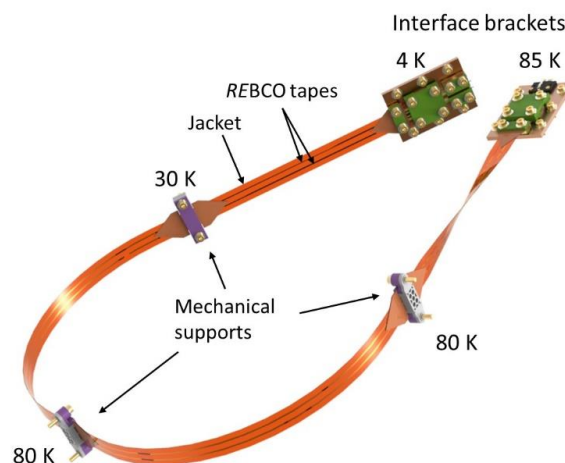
CAD Drawing of the full assembly of the HTS Harness including connectors and thermal/mechanical interface
